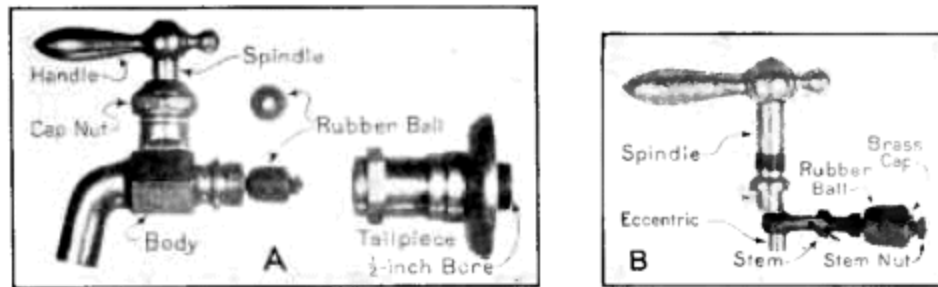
Fuller faucet: A, body unscrewed from tailpiece; B, spindle and stem removed from body.
